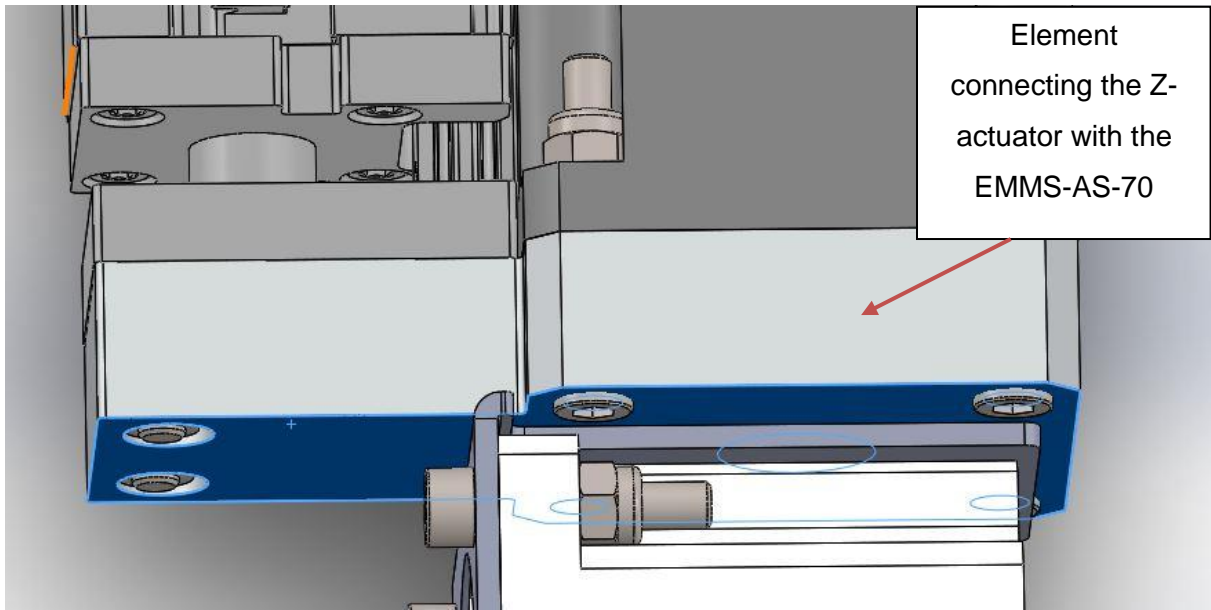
Z - actuator to EMMS-AS-70 servo motor fixture.
